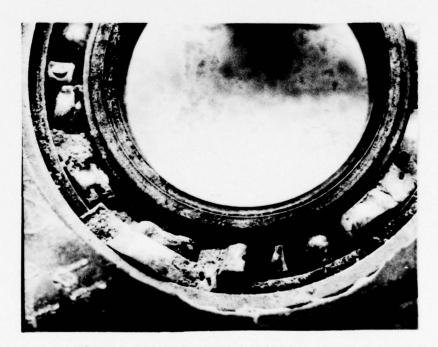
Bearing S/N TRL-5. 2.5x Enlarged View.
